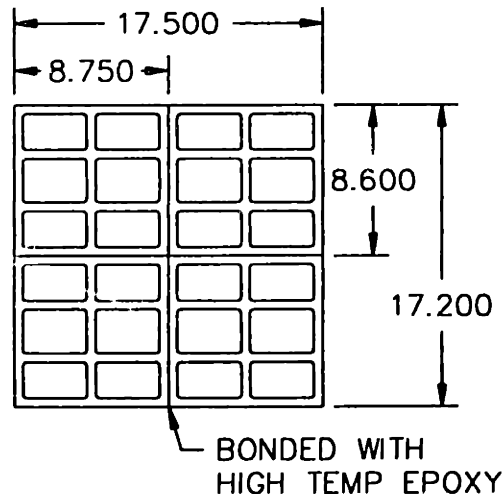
Cross-section of the beam used in the base structure of the WPGM base.
